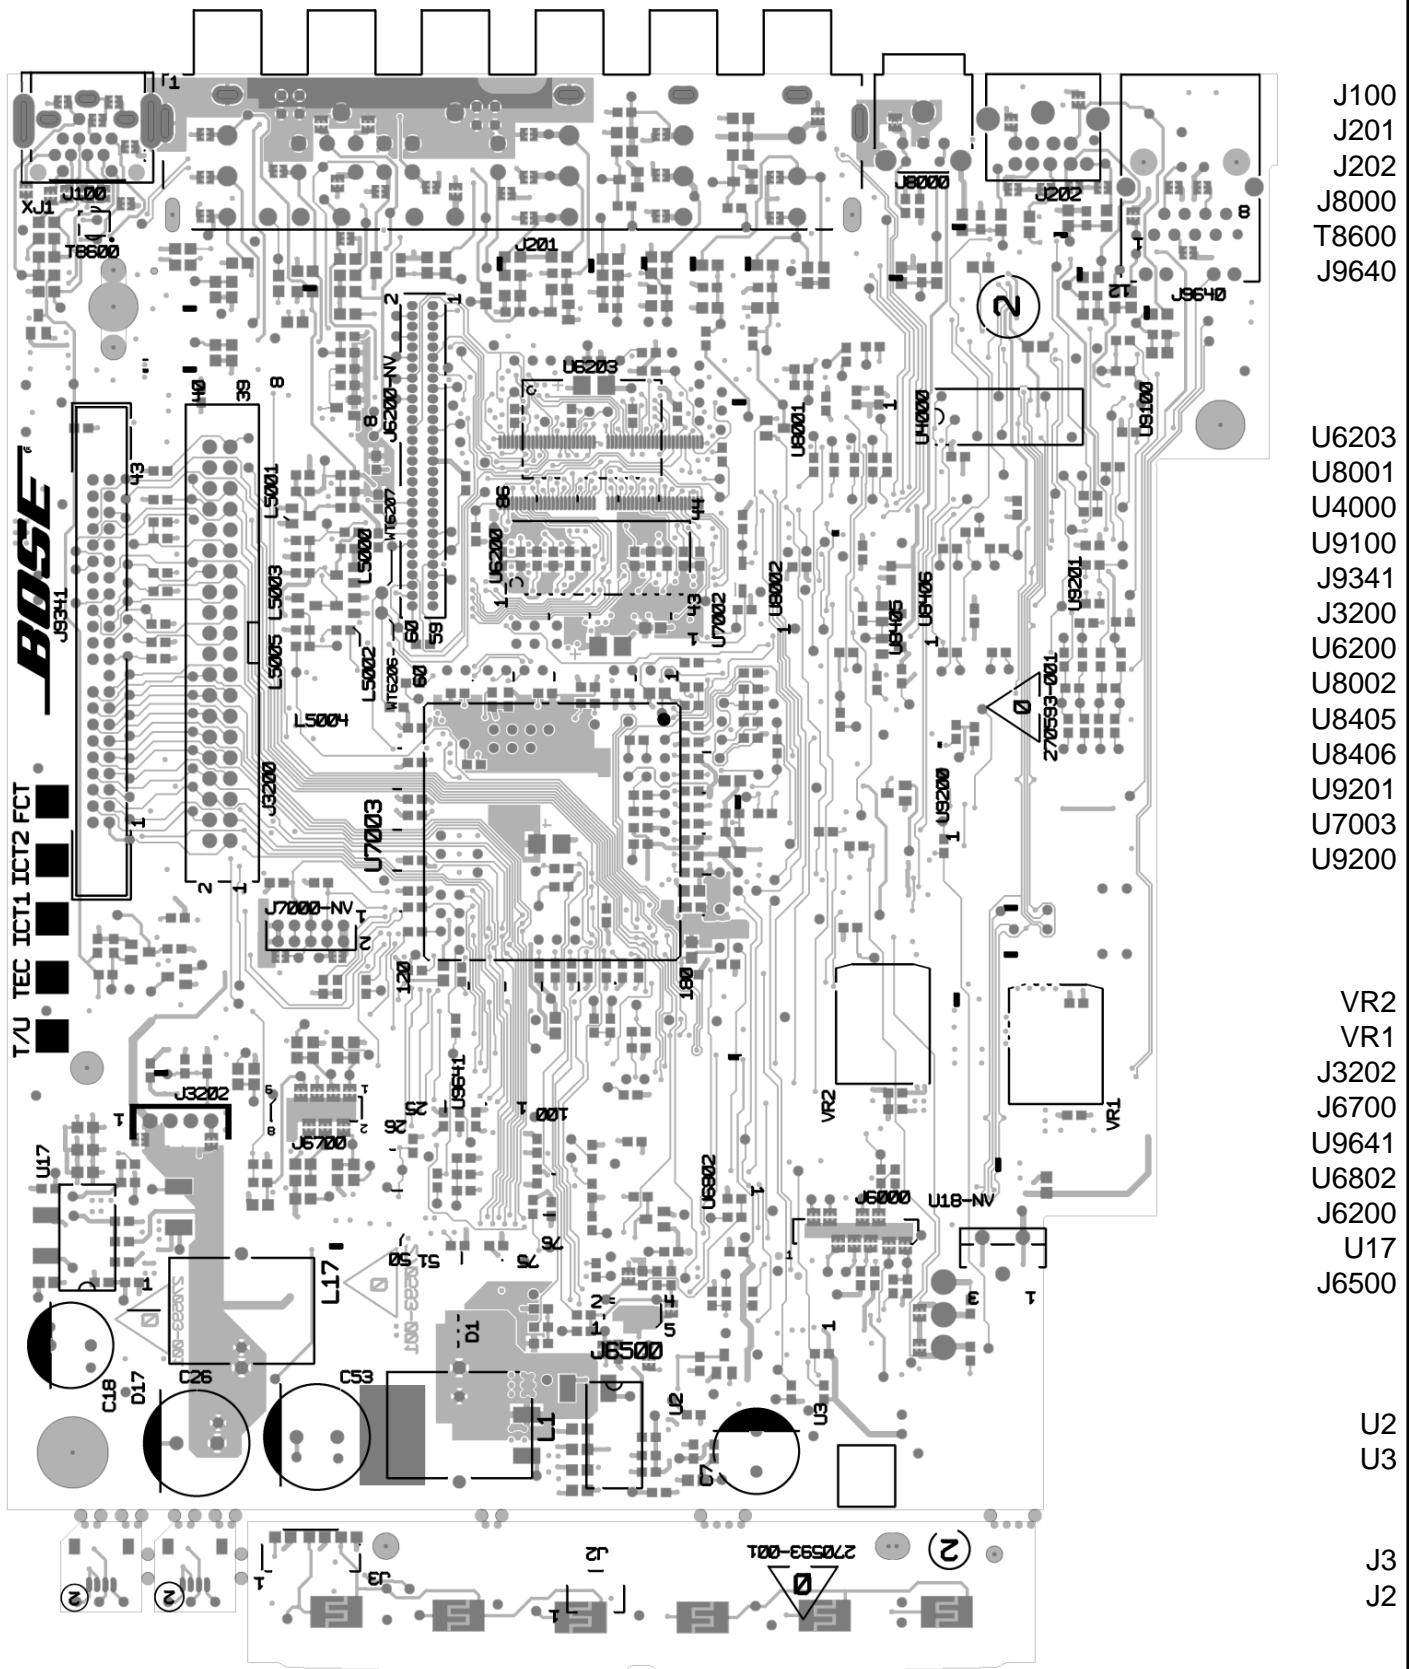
Console Main PCB Layer 4 Bottom Etch Layout Diagram
